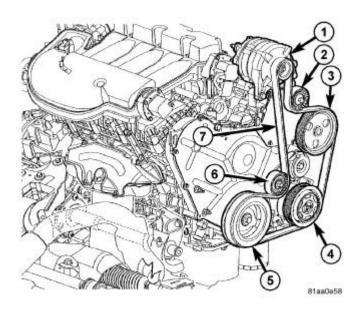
Identifying Accessory Drive Belt & Pulleys Courtesy of CHRYSLER LLC
